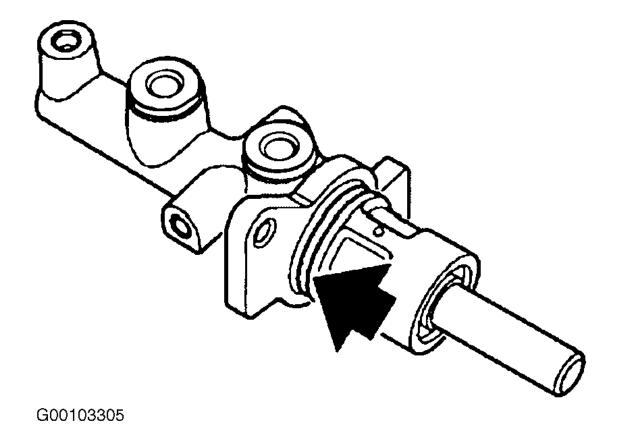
Locating O-Ring Courtesy of BMW OF NORTH AMERICA, INC.
